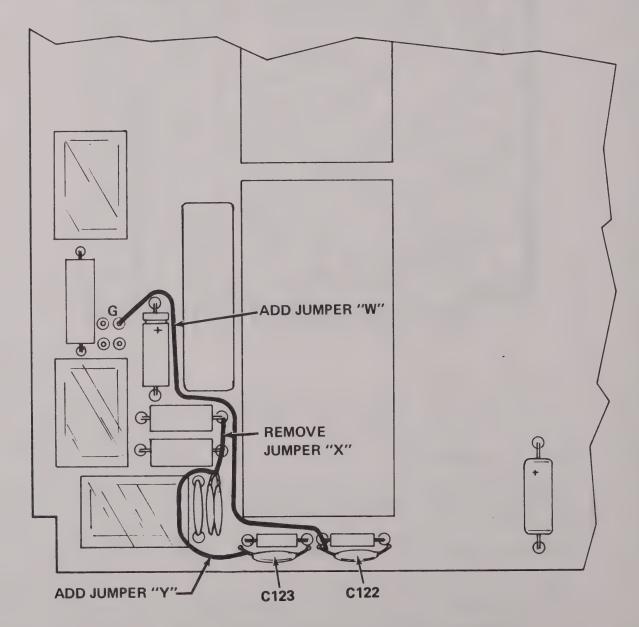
Component Side of I/O Trunk Board TRN6469A Showing Jumper Location (See Paragraphs 2 and 3 for specific directions)
